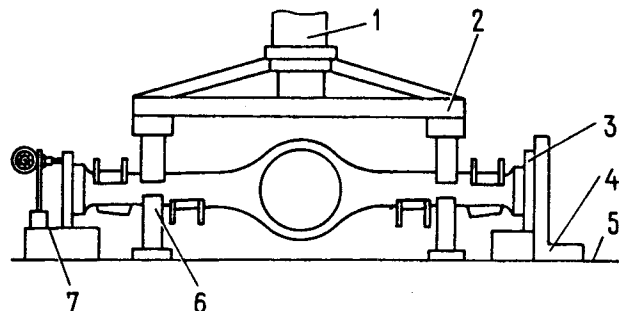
Straightening Rear Axle Beam. Diagrammatic:
